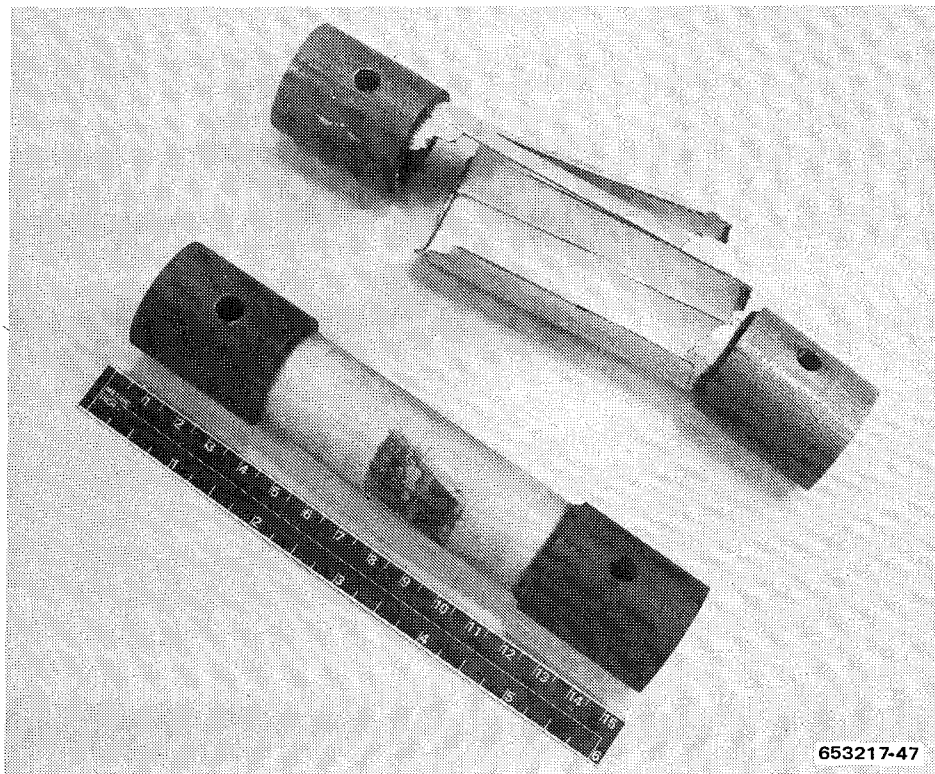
B/Al Tube Specimens After Shear Testing: Upper, Specimen EU06-1, Twisted to Failure in Shear; Lower, Specimen EU06-12, Twisted to Maximum Capability of Test Machine
